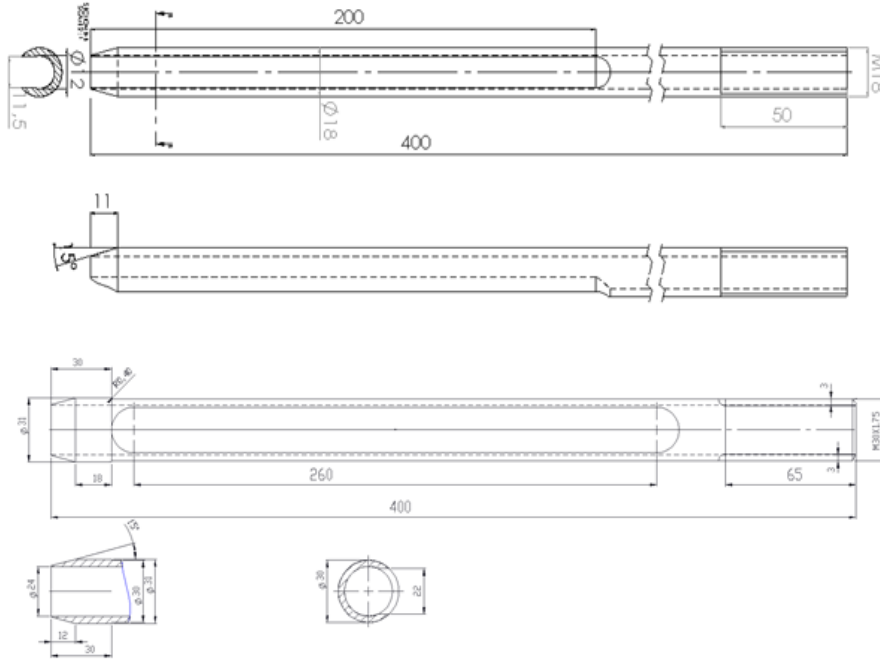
The dimensions of soil sampling probes in 12 mm and 24 mm inner diameters
